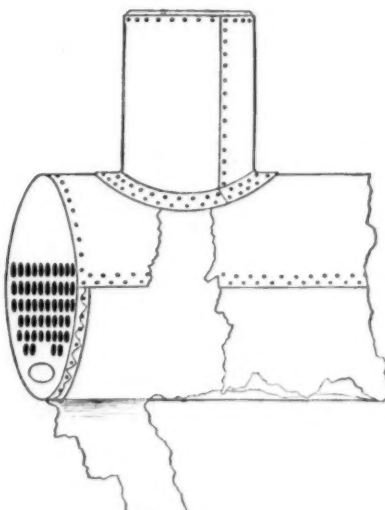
Front End of Left-hand Boiler, Showing Torn Plates.
